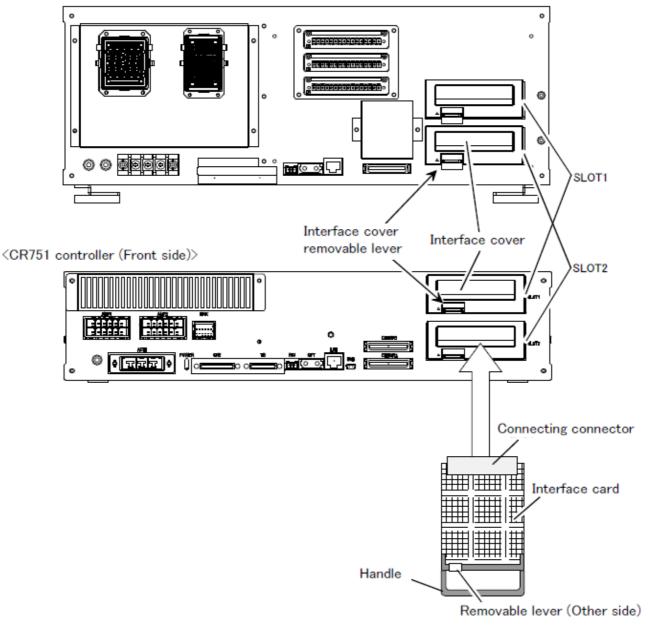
Mounting of the 2D-TZ535 card (CR750-D/CR751-D controller)
